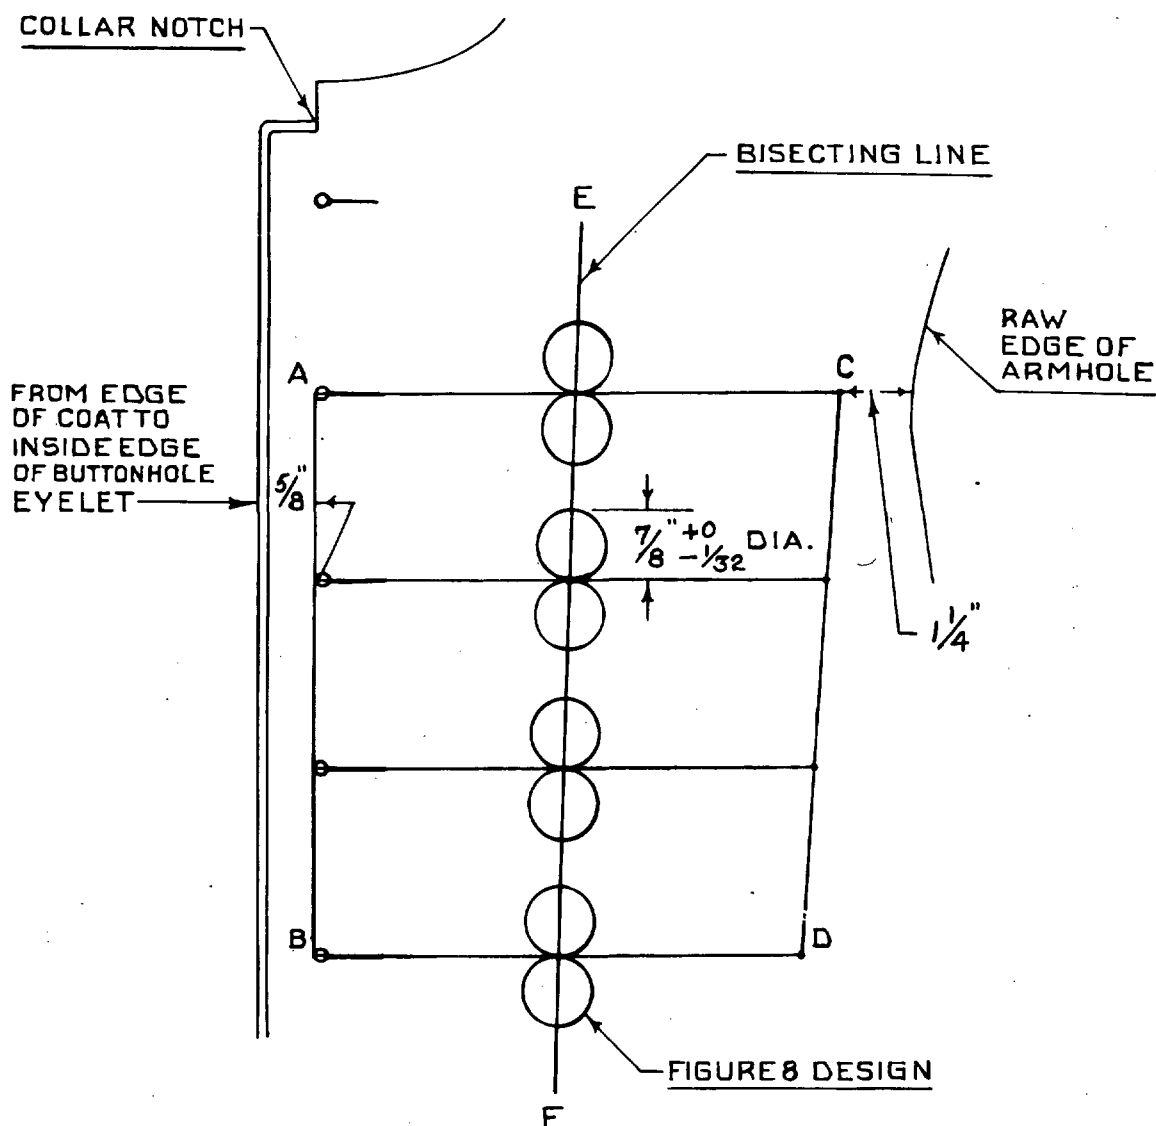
COAT, MAN'S: SCARLET, DRUM & BUGLE CORPS; DRUM MAJOR
